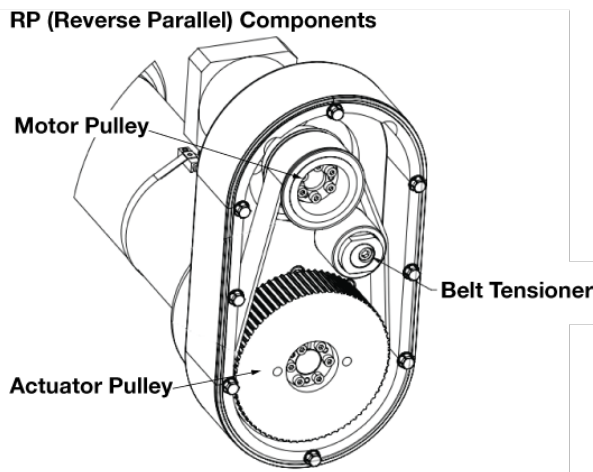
This view of the RSH reverse parallel (RP) shows the belt path in relation to the motor pulley, actuator pulley, and RP tensioner.
